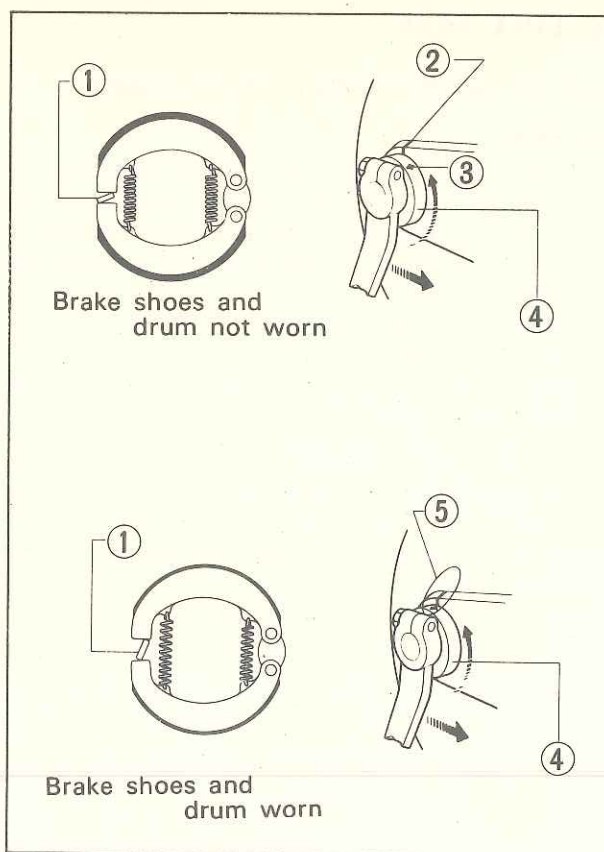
(1) Brake cam (4) Brake indicator plate
